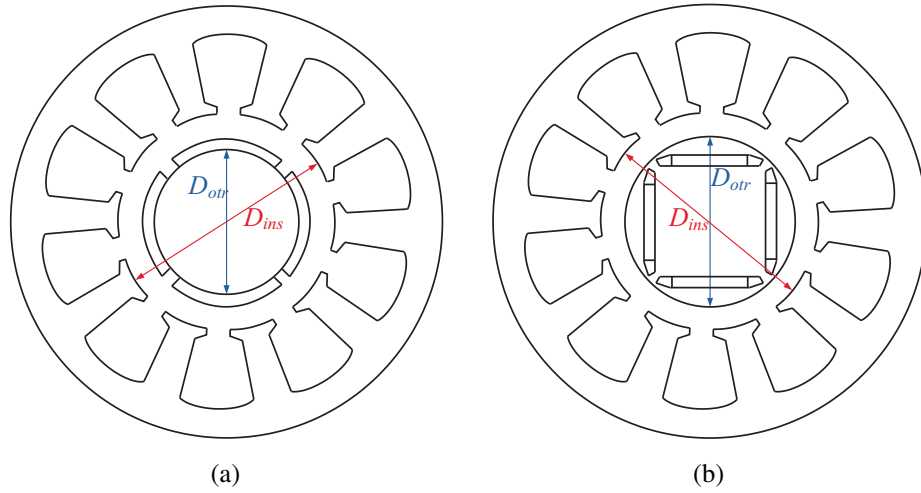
Inner stator diameter and outer rotor diameter; (a) surface permanent magnet machine, (b) interior permanent magnet machine.
